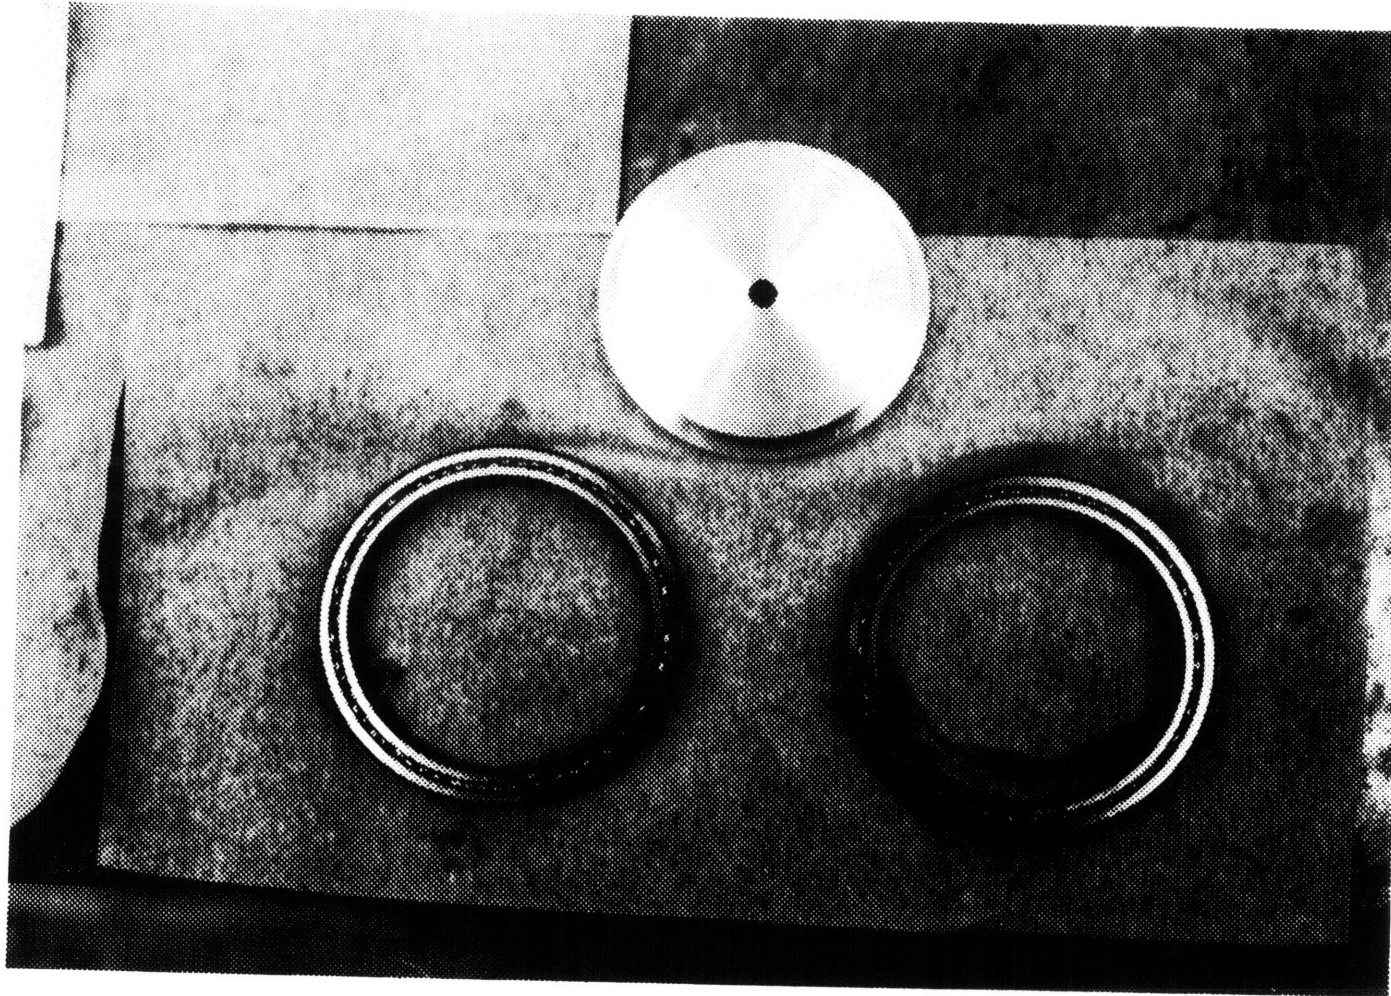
Kaydon "Reali-Slim" 2" bearings lubricated with MIL-L-6085 oil
